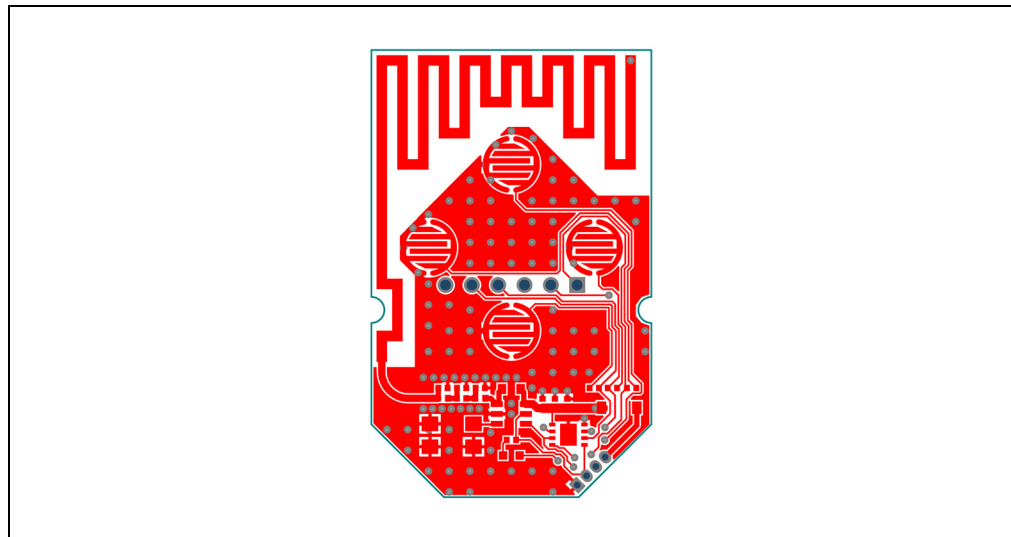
KEY FOB PCB ASSEMBLY - TOP SILKSCREEN
